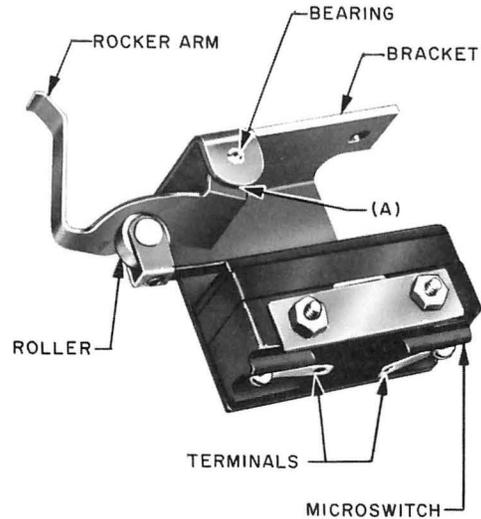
Splice Contact Assembly — D-175914 Perforator
